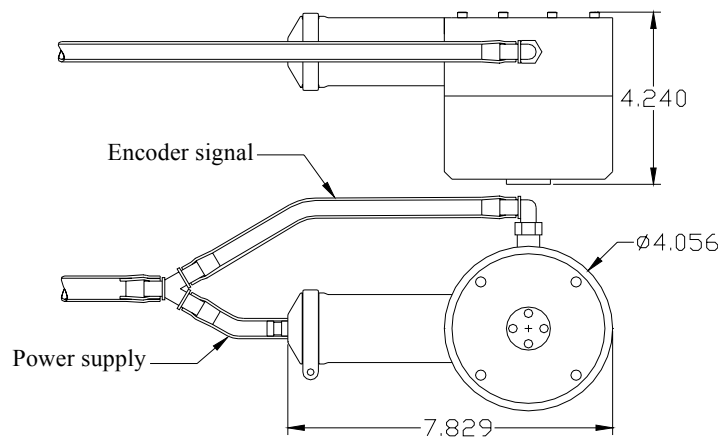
Actuator schematic, units in inches. Drawing courtesy of Tecnydyne, Inc
